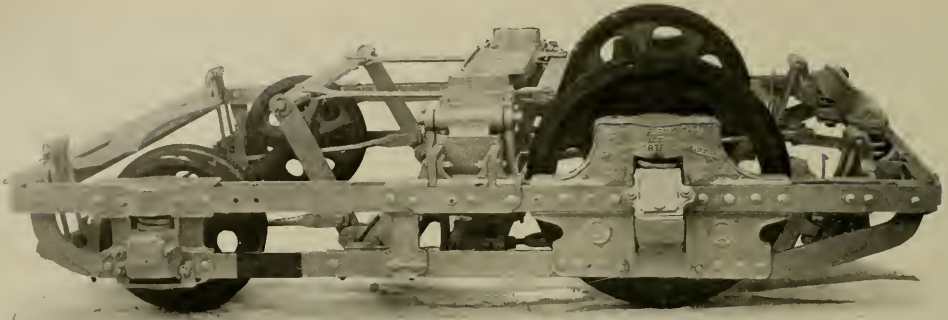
TRIPLE CUSHIONED SWING BOLSTER CENTER BEARING NO. 14 D.
